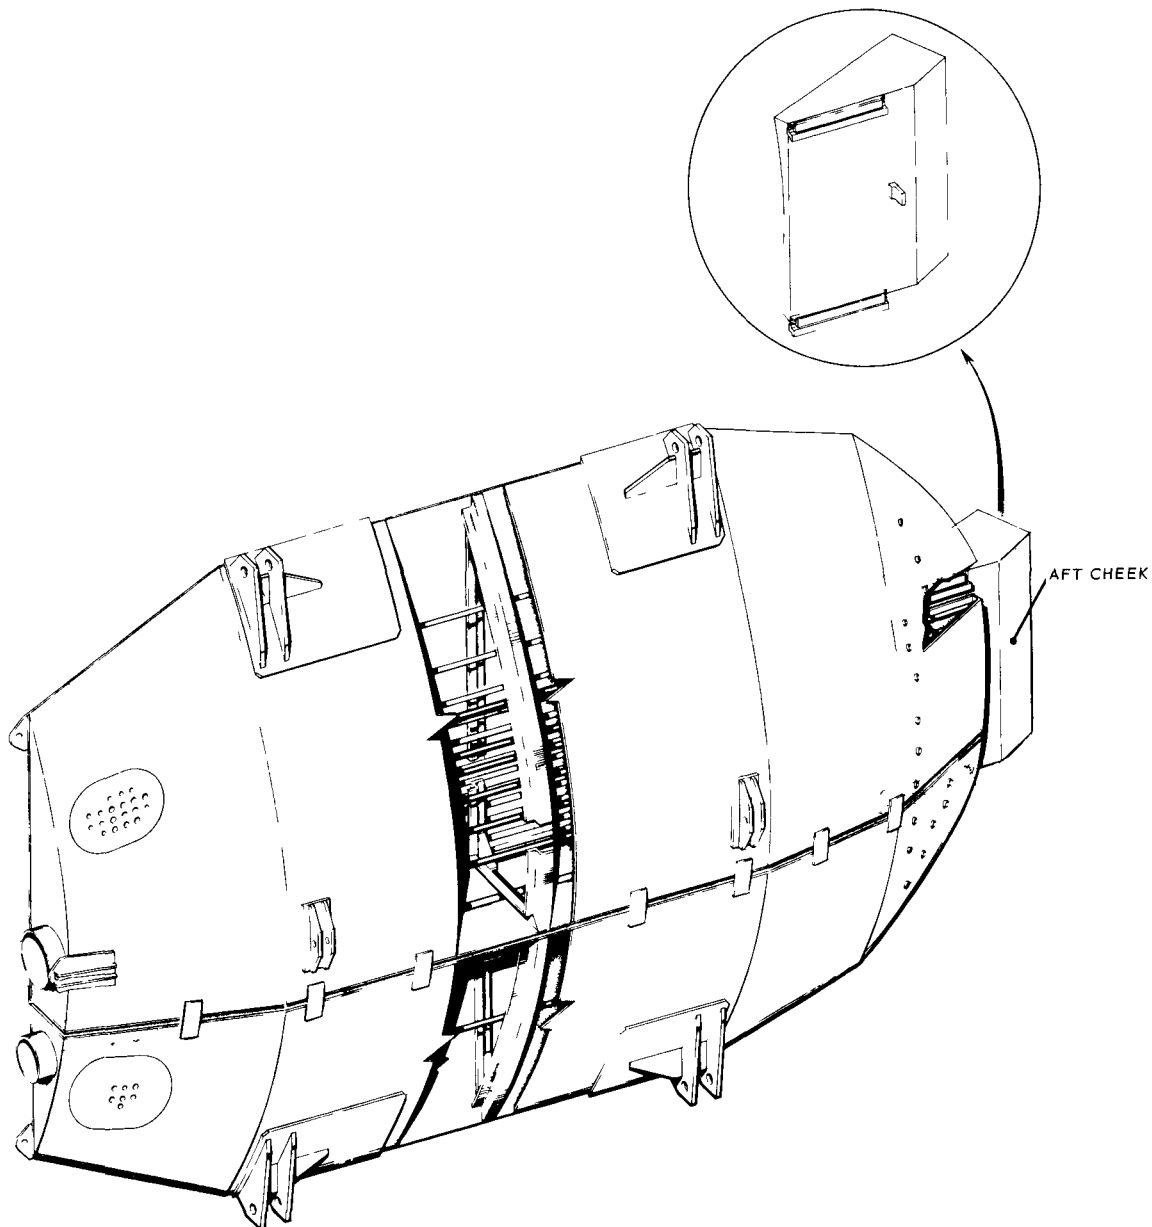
Schematic view of shield cheek assembly (Dwg. DI472)
